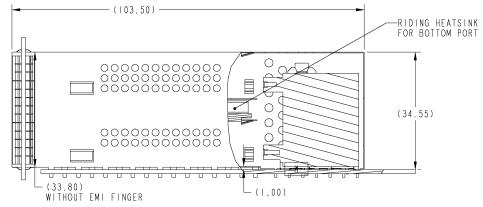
Side view of 2x1 cage with vertical cage dimensions, 19.9mm pitch
